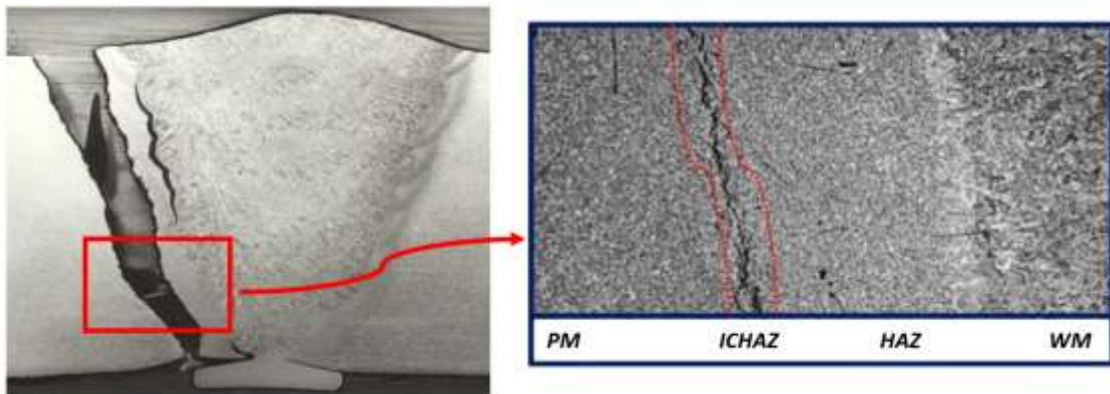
Image of cracking in the ICHAZ of P91 welded connection (R Barrett [28]).
